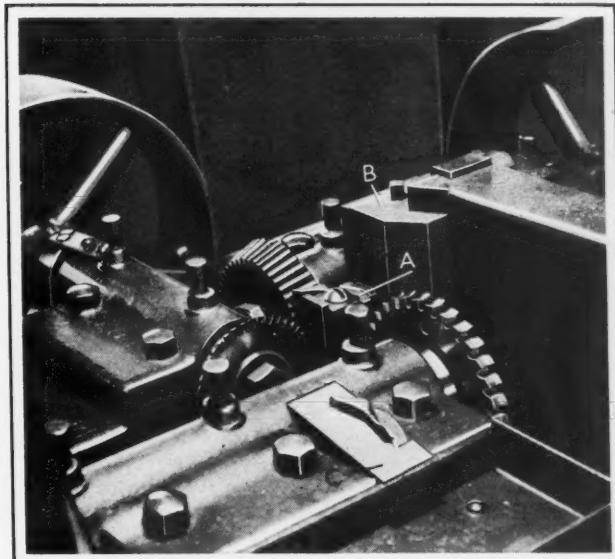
In This Machine the Face, Top Clearance, and Heel of the Tooth are Milled Simultaneously
